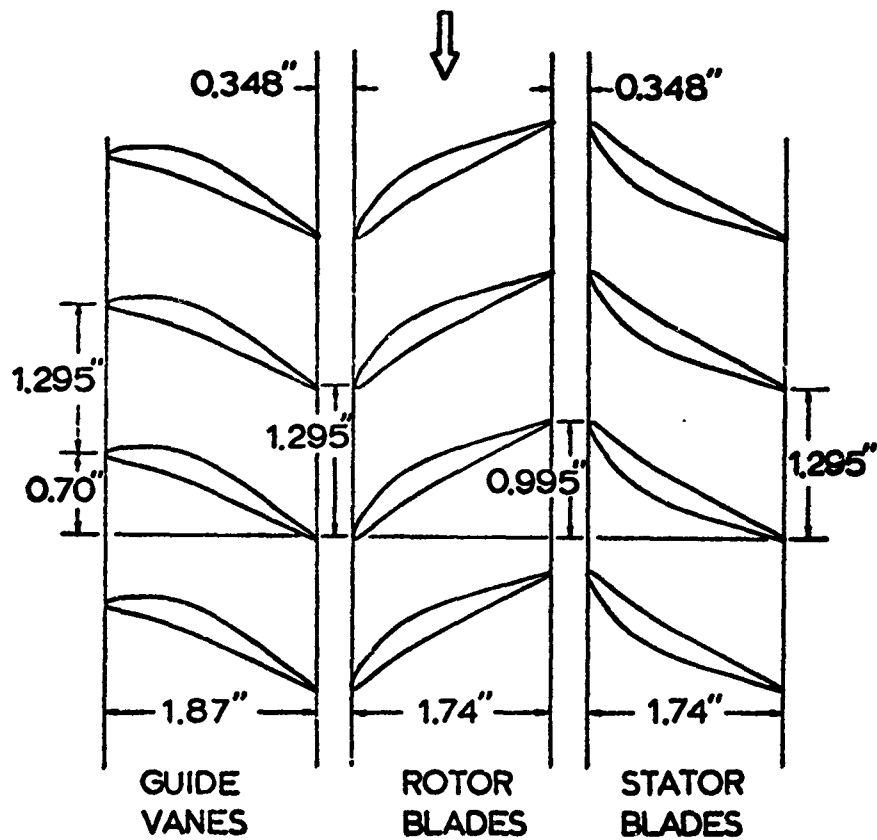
COMPRESSOR STAGE DIMENSIONS
